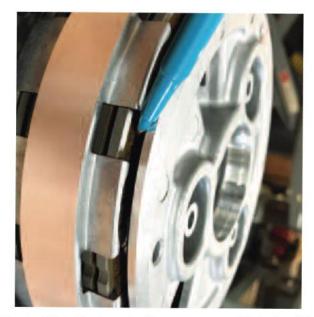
Not seated - see gap. Clutch will not work. Install friction steel friction on the pressure plate and hold as one unit while sliding on to locate teeth on the inner hub. They must mesh and sit flat like in Photo #1.
